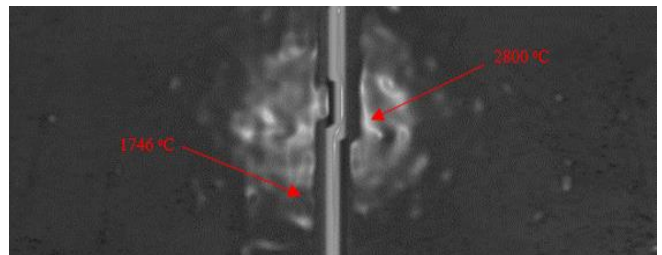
Weld Pole of the Fusion Zone at Minimum and Maximum Temperature.
